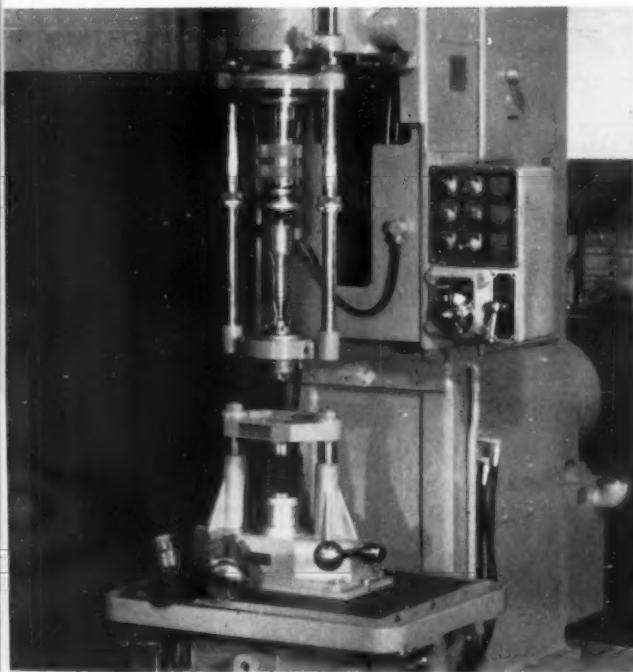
Parallel-plate fixture uses a pump jig for clamping workpiece; Locating and clamping surface must be parallel to prevent part distortion.
